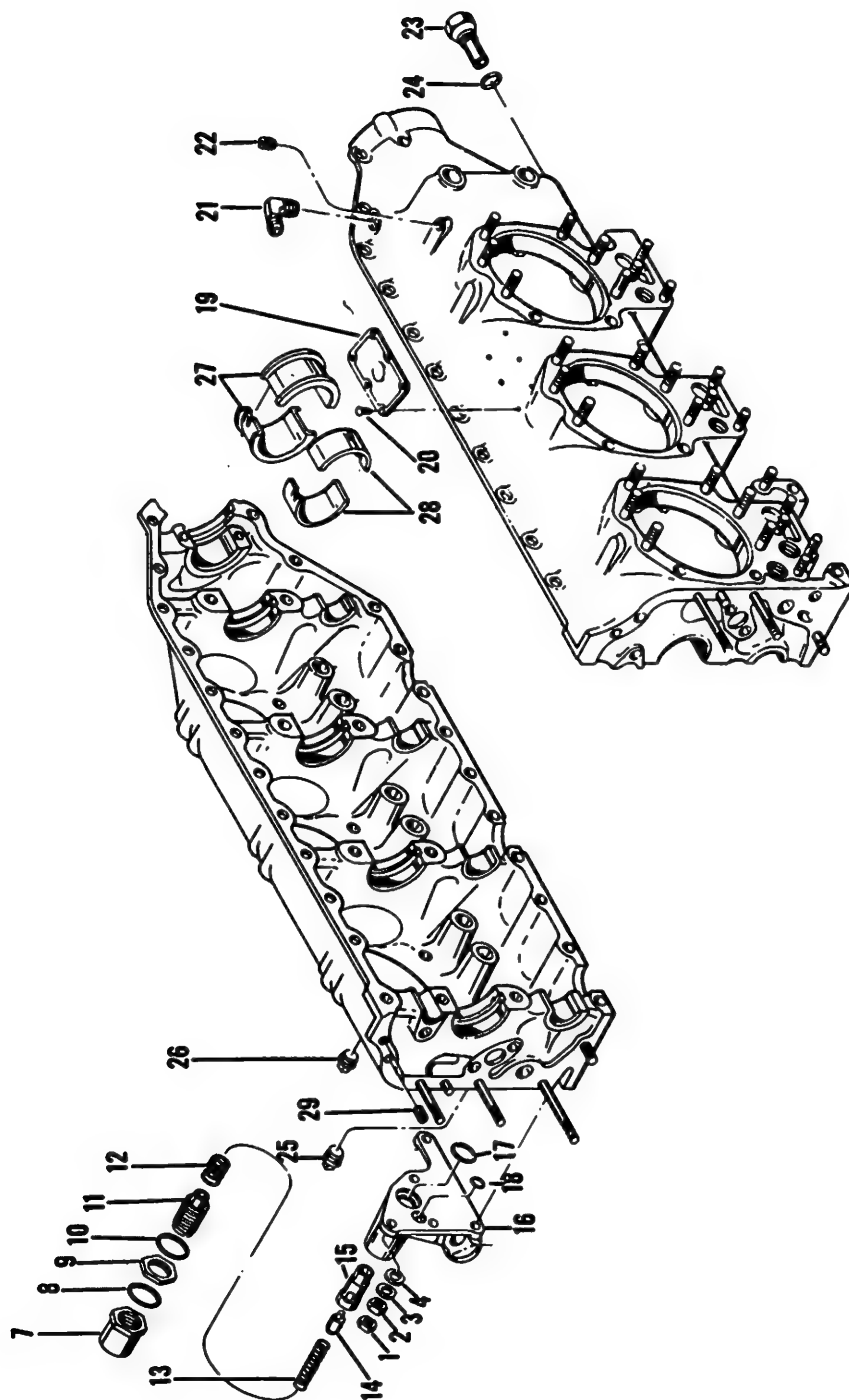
Main Bearings and Oil Relief Valve - Crankcase
